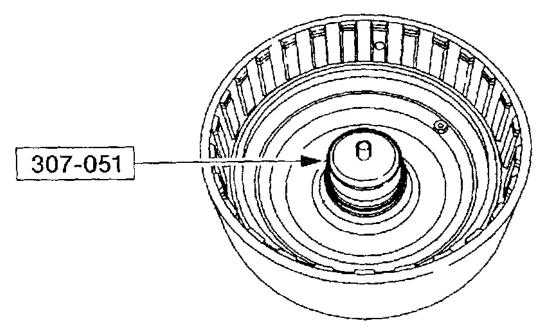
Installing Piston Seal Sizer On Forward Clutch Piston
